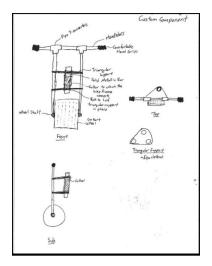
Initial Steering System Sketch with Custom Triangular Connector to Head Tube
